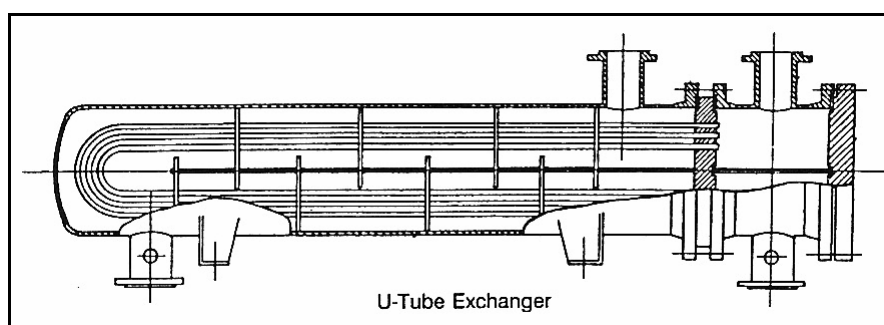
U-tube, baffled single-pass shell, shell and tube heat exchanger
